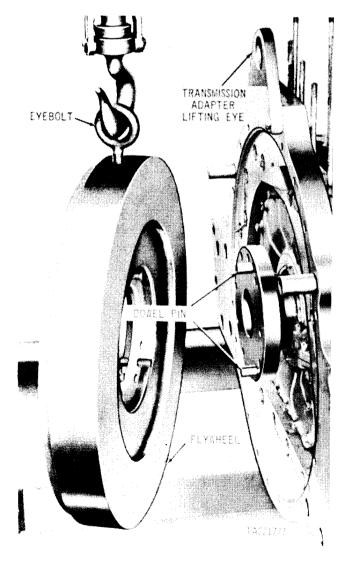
Installing flywheel using eye bolt, model AVDS-1790-2C and AVDS-1790-2D engines.
